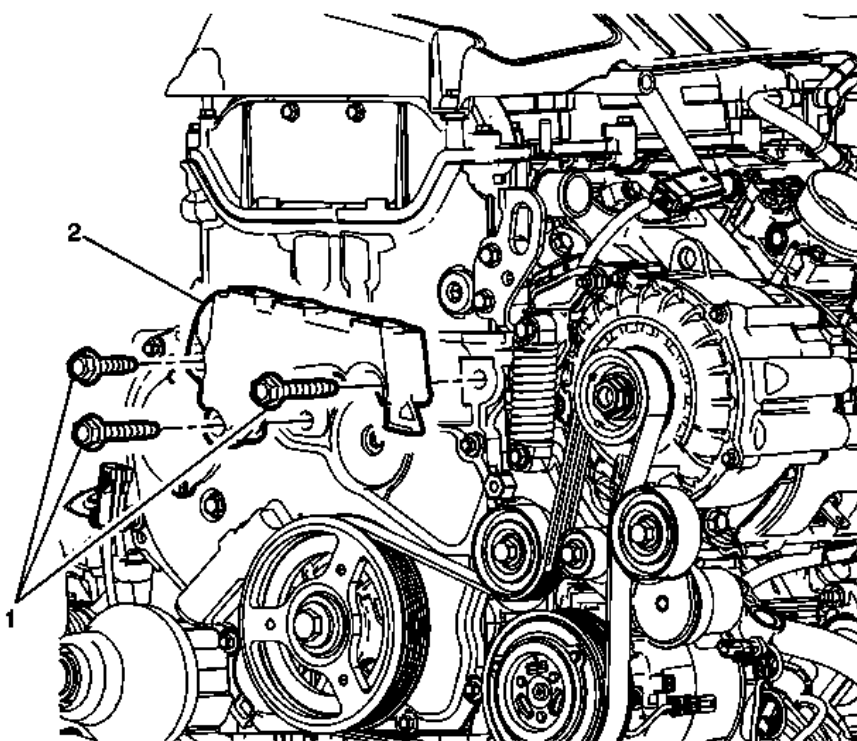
Engine Mount Bracket & Bolts (LUK)
